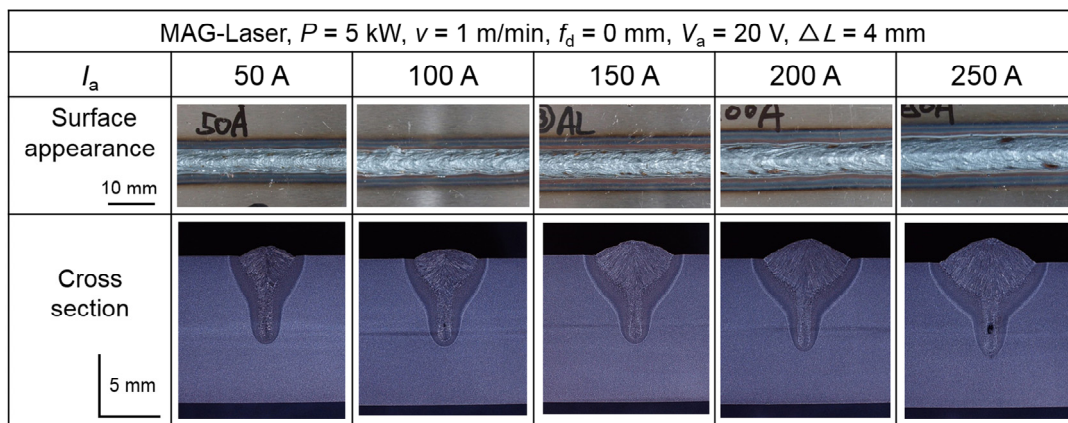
Surface appearances and cross sections of weld beads produced by hybrid welding at various welding currents.
